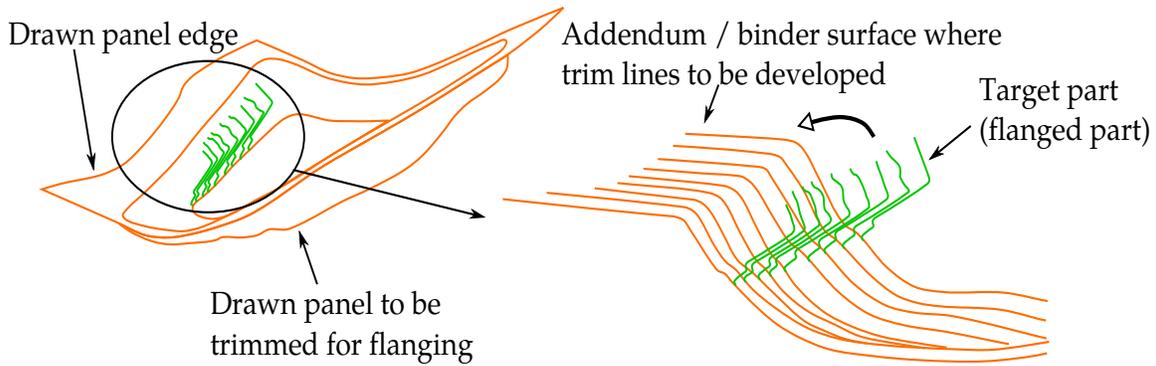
Multiple section view showing the target part and addendum surfaces.
